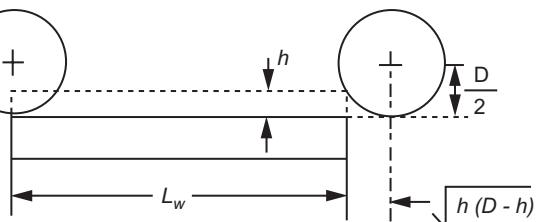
Relative motion between the workpiece and a plain milling cutter.
